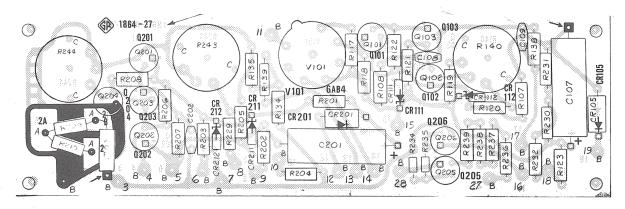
Regulator and amplifier circuits etched-board assembly for 1863 and 1864
